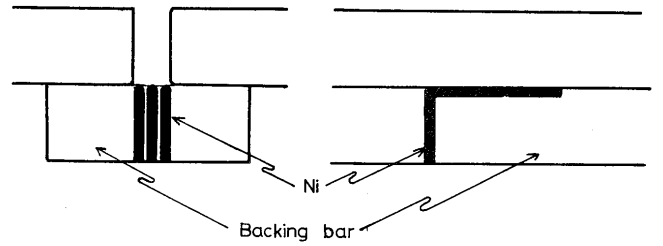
Setting of L-shaped Ni wires at the work piece.
